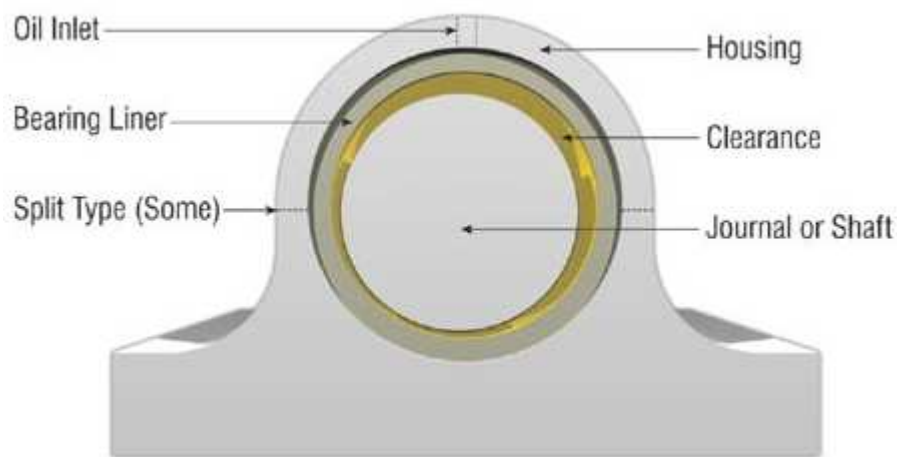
Shaft Riding on Lubricant in Journal Bearing
